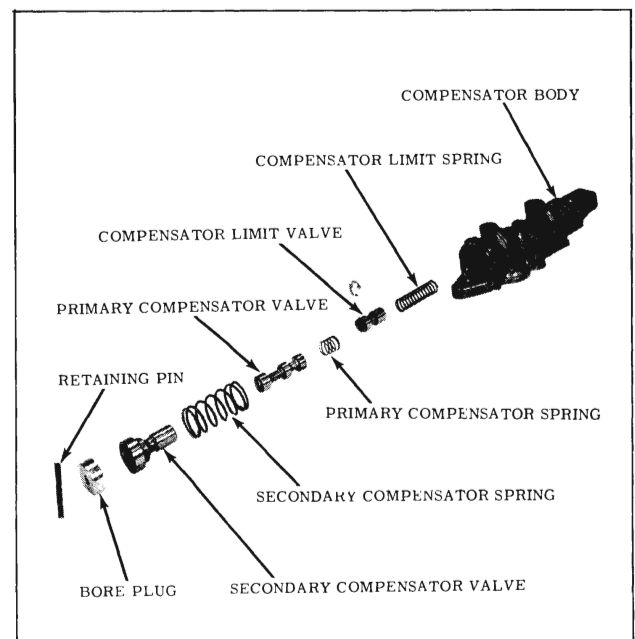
Three Stage Compensator Valve ("O", "OC" & "OCH")
